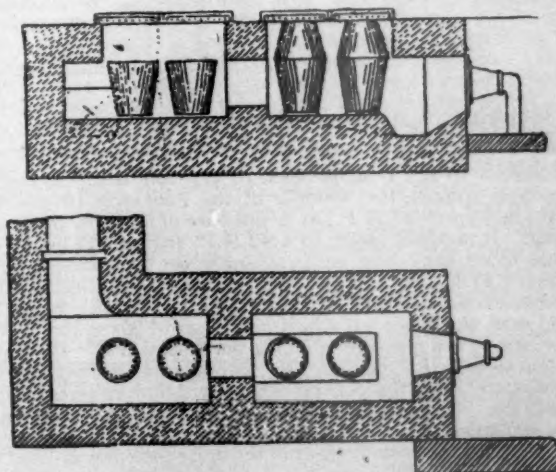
SECTIONAL VIEW OF APPARATUS FITTED TO BOILER.
